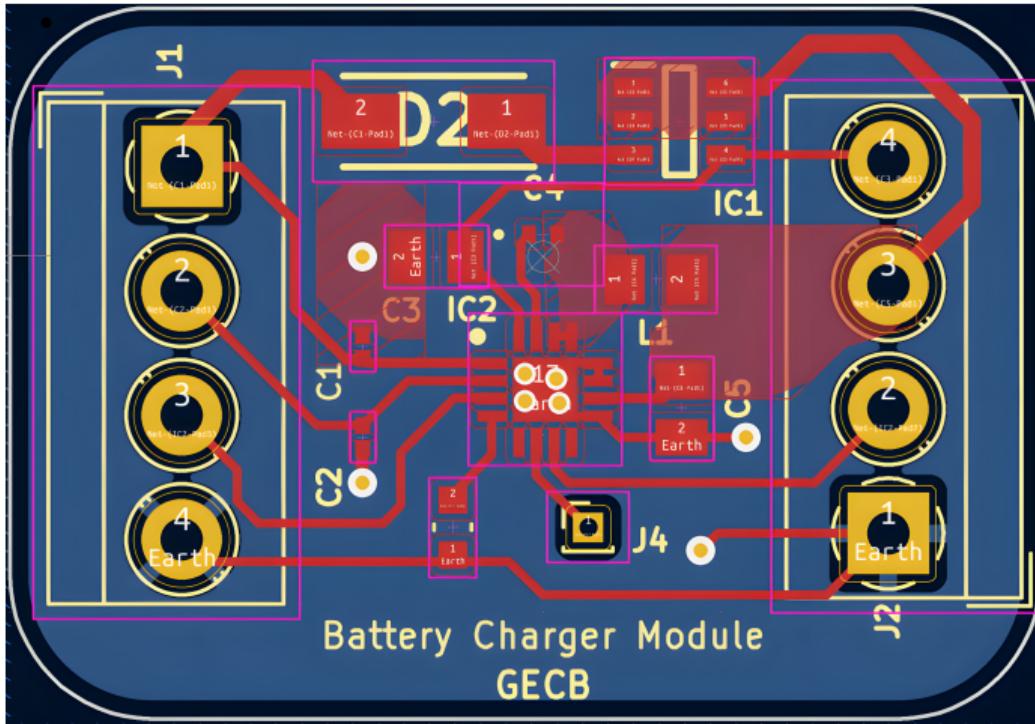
PCB Layout of Battery Charger (29mm x 20mm)
